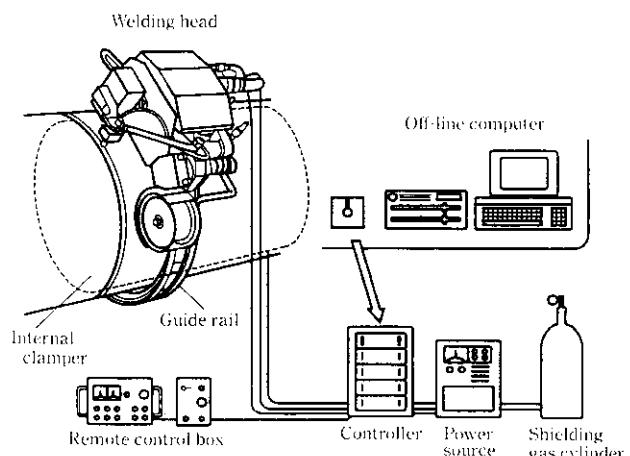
Computer-controlled circumferential MAG welding system
